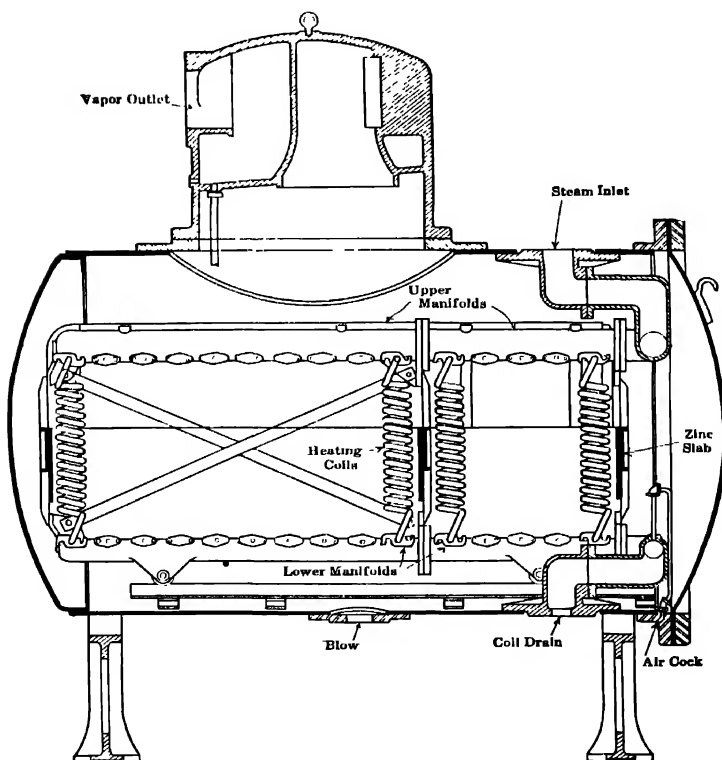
Submerged-tube Type Evaporator. (Reilly.)
